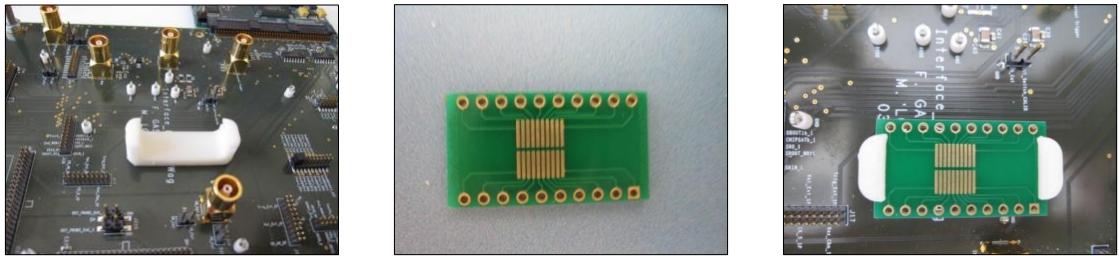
PCB Base (in the middle) glued to the interface board using a plastic support (on the left). The buffer chip must be soldered on that base (not shown in the pictures, yet). You can solder the buffer chip in any position on the base as long as it is soldered properly.
